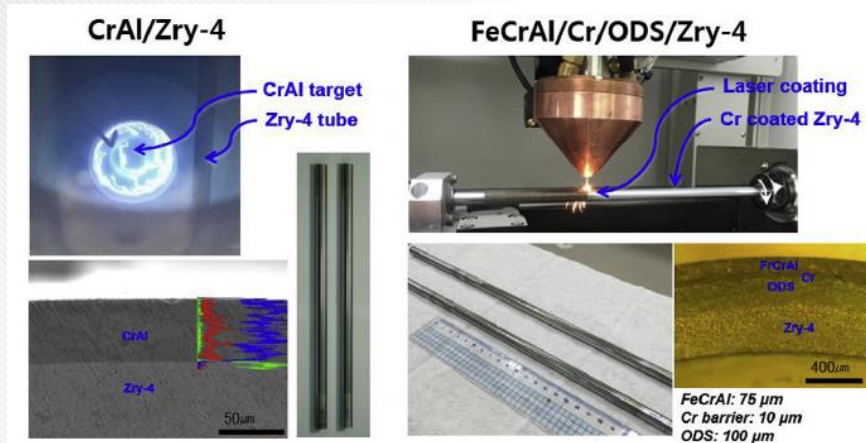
Manufacturing example of surface modification technology using arc ion plating and 3D laser process.
